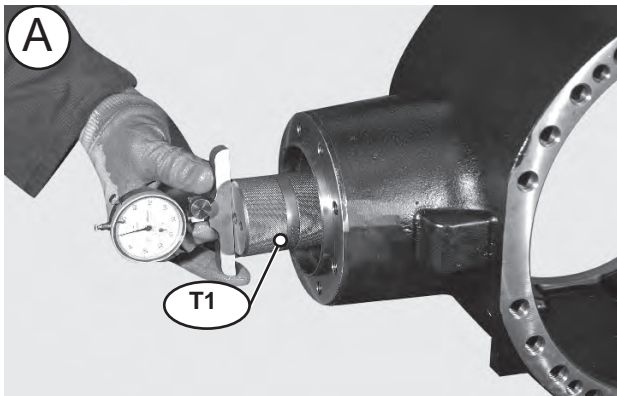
Introduce the tracer of a dial indicator into either side hole of tool T1 (See drawing T1 p. 64).
